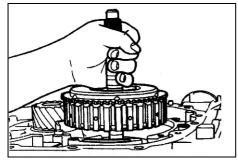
A-101 (50) Install old thrust bearing #1. see Fig.11A-102.
